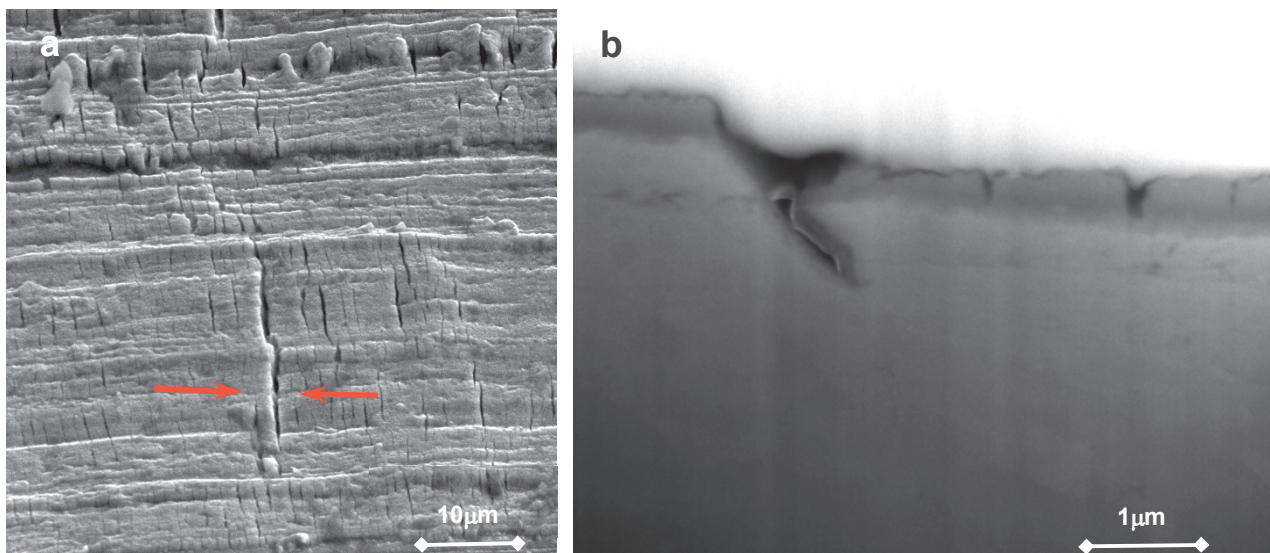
SEM detail of surface cracks in T91, in the necking region about 2 mm from fracture. a) Top view of surface cracks (red arrows point to the location of the FIB cut) and b) FIB cross section of the surface cracks
